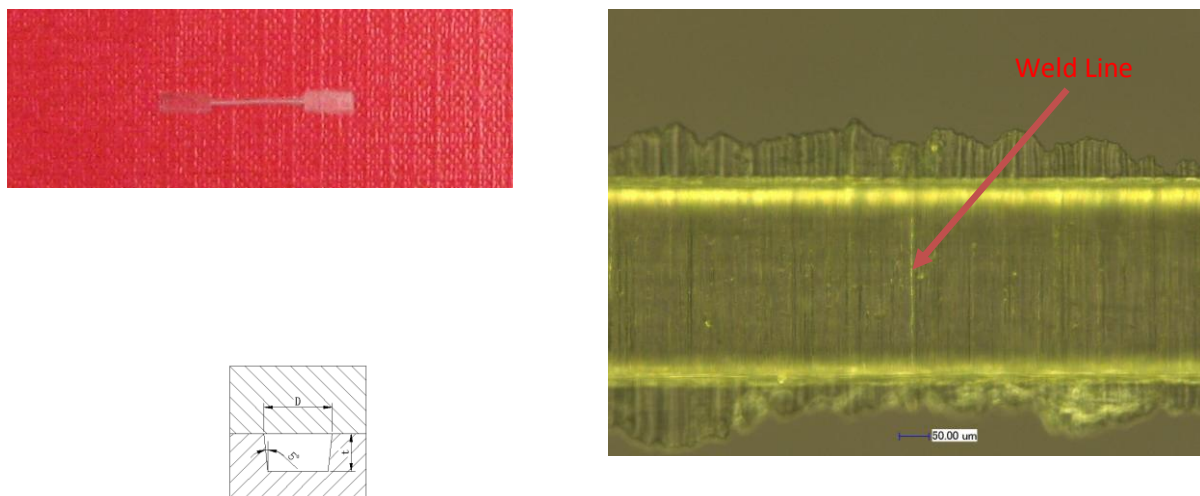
Micro tensile specimen with trapezoid cross section and its weld line
